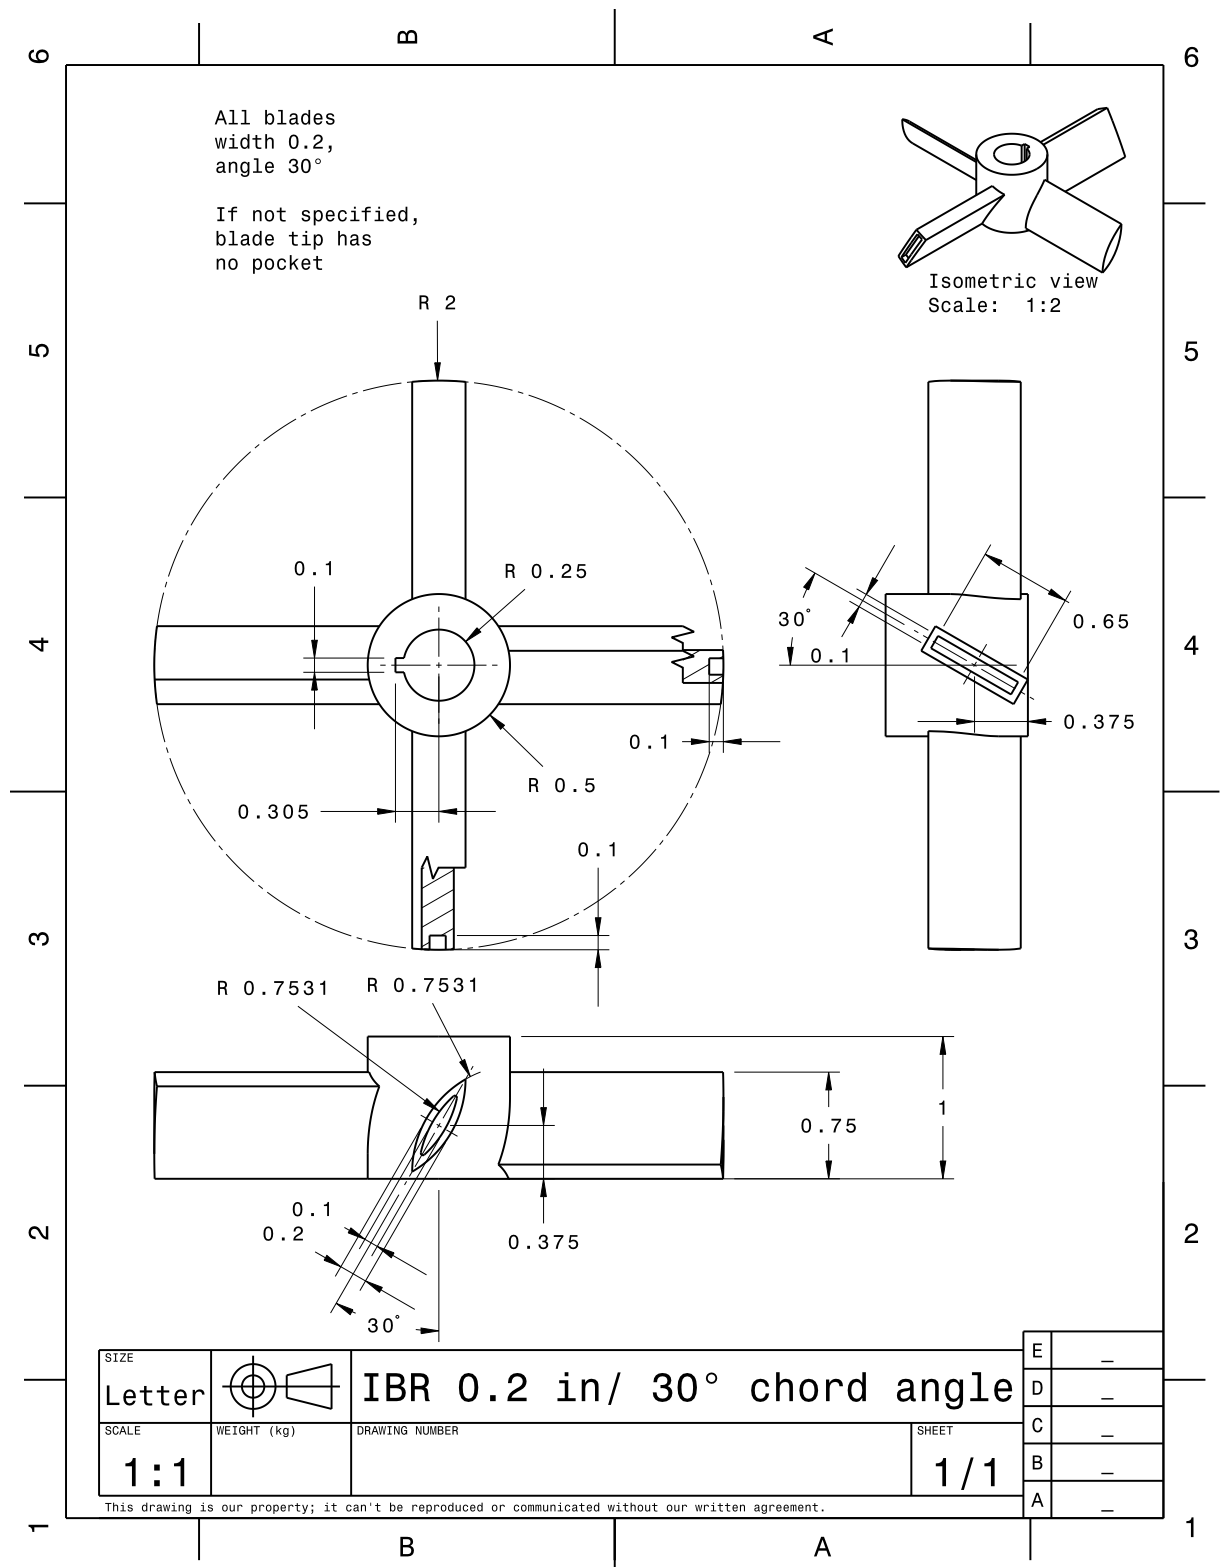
Technical drawing of IBR with blade width 0.2 in and chord angle of 30°
